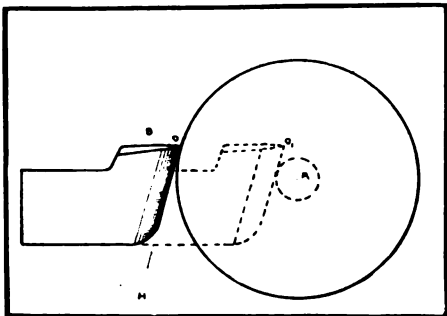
Showing the Cutting Angles of a Lathe Turning Tool.
